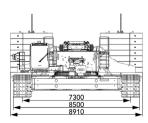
SCC3500A-6 Type 350 t crane dimensions (mm) 图 1. SCC3500A-6 型 350 t 主吊吊机尺寸(mm)
